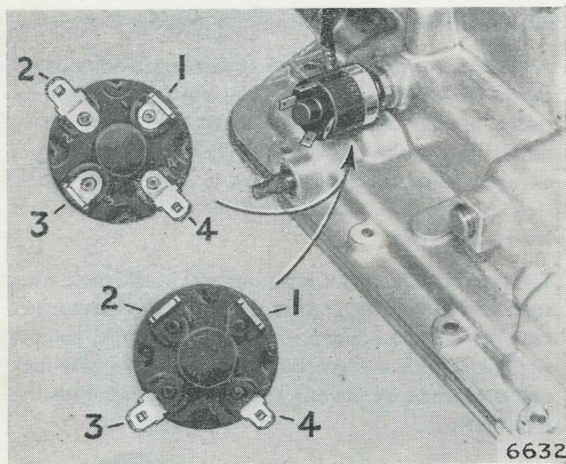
Starter inhibitor switch—upper end view shows latest switch, and lower end view early switch.
